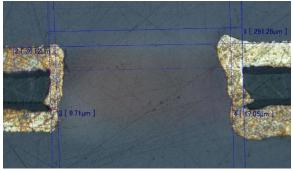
Through-plated hole UV laser drilled; material thickness 125 μm
